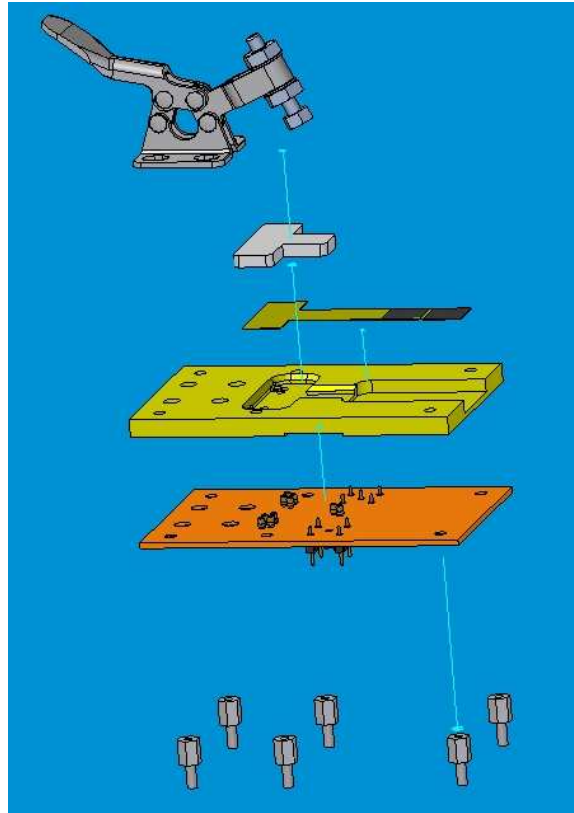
An illustration of the components in the reusable test fixture and how all layers were assembled.
